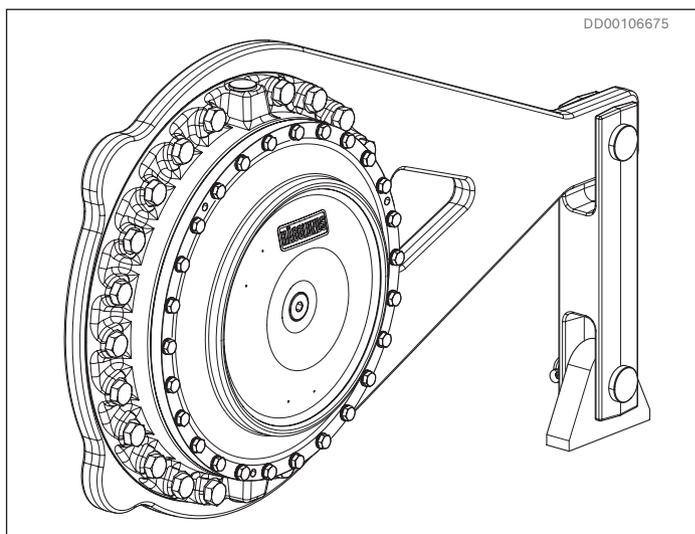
Example MDA 14 or MDA 21 seperately mounted (torque arm mounting).
